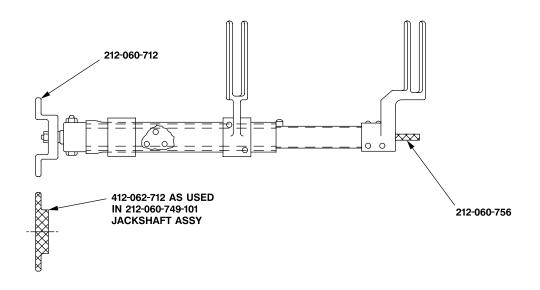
Jackshaft Assembly (212-060-749) Mechanical and Corrosion Damage Limits (Sheet 2)
